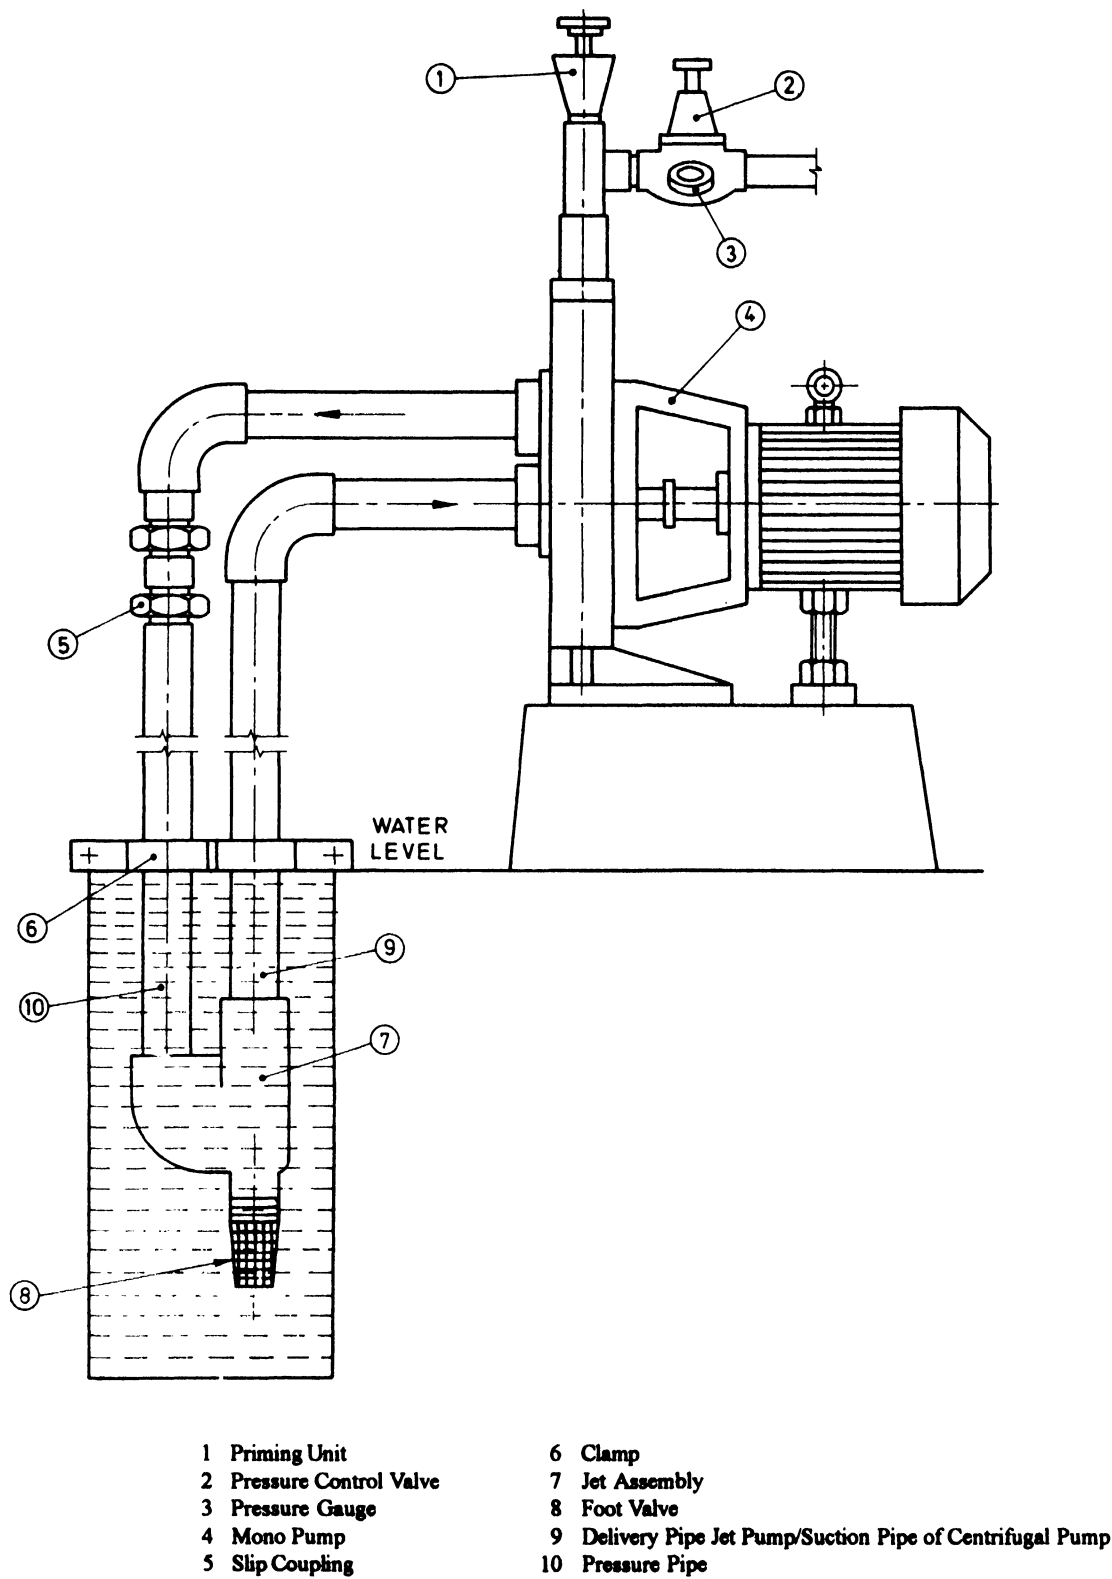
TYPICAL INSTALLATION FOR TWIN TYPE CENTRIFUGAL JET PUMP
